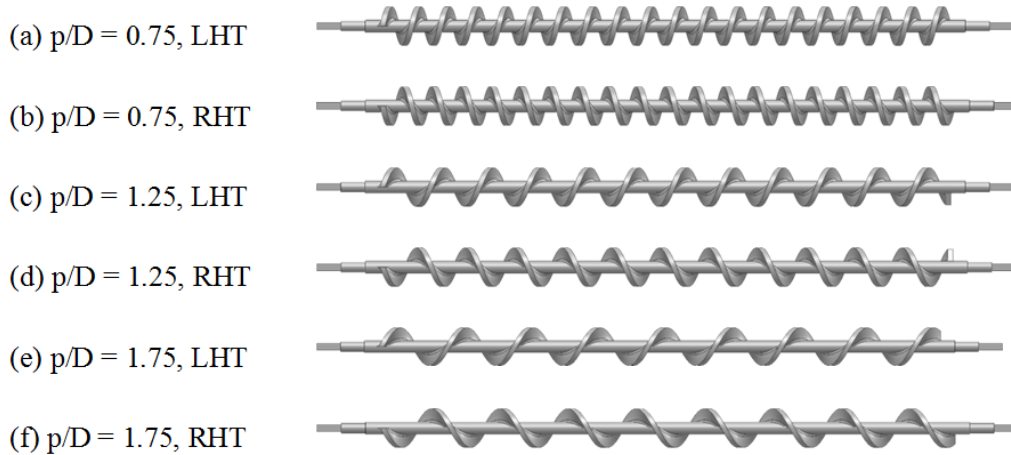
The six combinations of dimensionless screw pitch and screw flighting thread directions used in this project.
